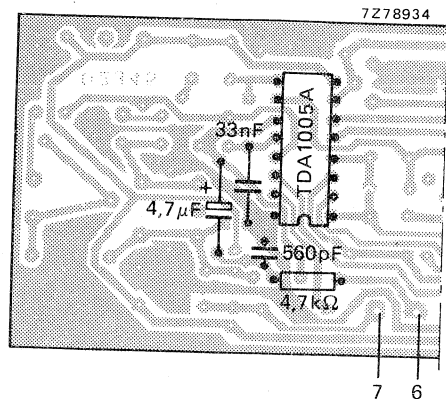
Printed-circuit board component side, showing component layout of Fig. 15.
